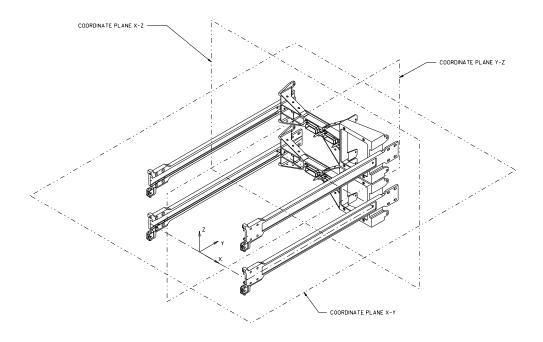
HRF Slide Guide Assembly Coordinate System
